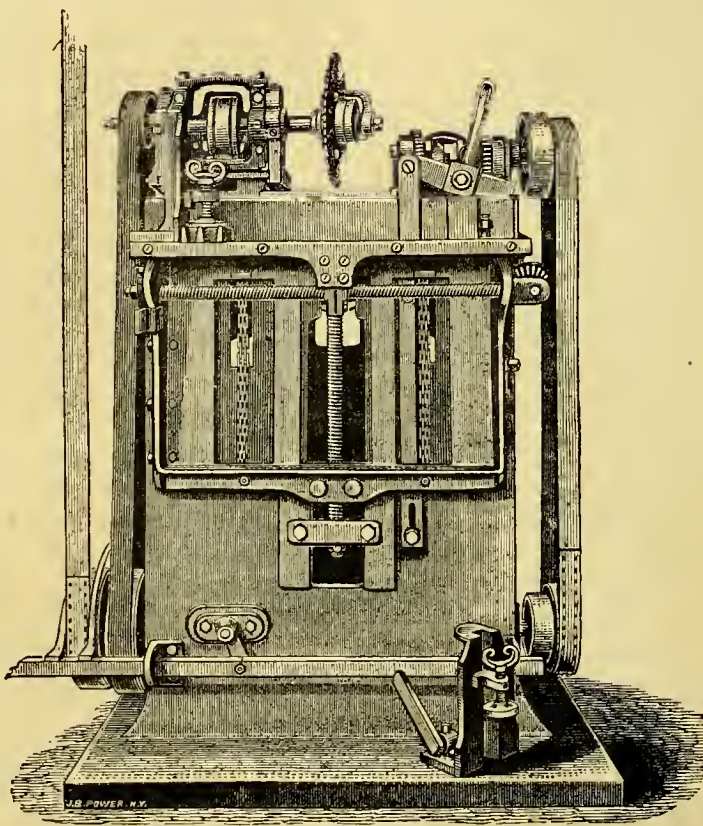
TIGHE HAMILTON'S PATENT DOVETAILED MACHINE.
